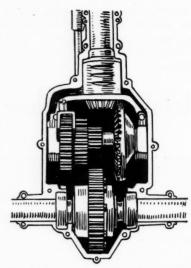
Cameron three-speed spur gearset which gives three forward variations. The propeller shaft telescopes, allowing endwise play that brings the spur gears into mesh with the driven gear
